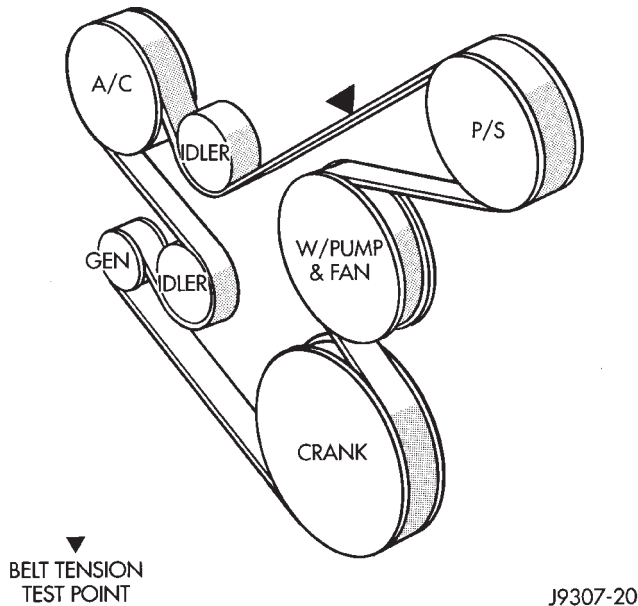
Belt Routing—4.0L 6-Cylinder Engine
